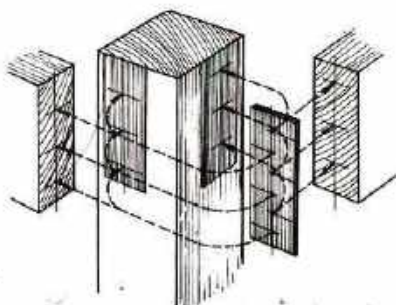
LAYING OUT FOR OFFSET DOWELING
